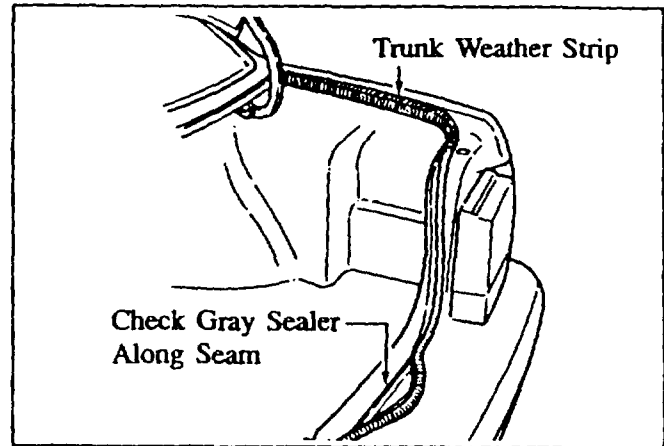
Checking Grey Sealer Under Trunk Weatherstrip
